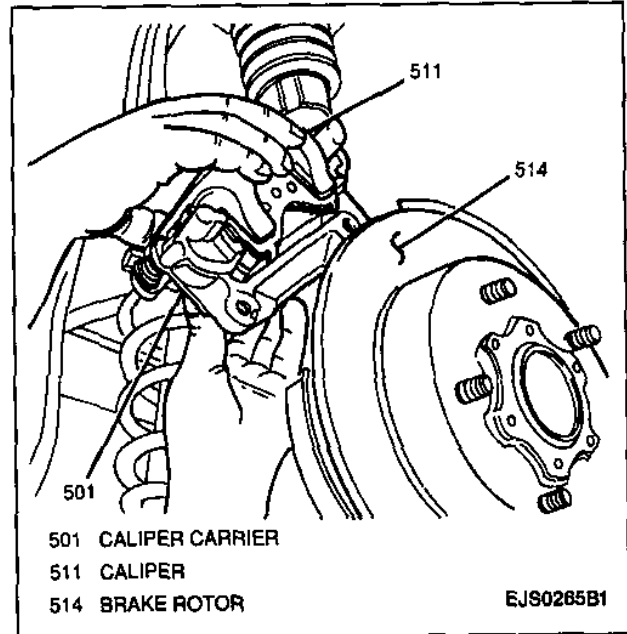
Removing Caliper/Caliper Carrier from Brake Rotor
